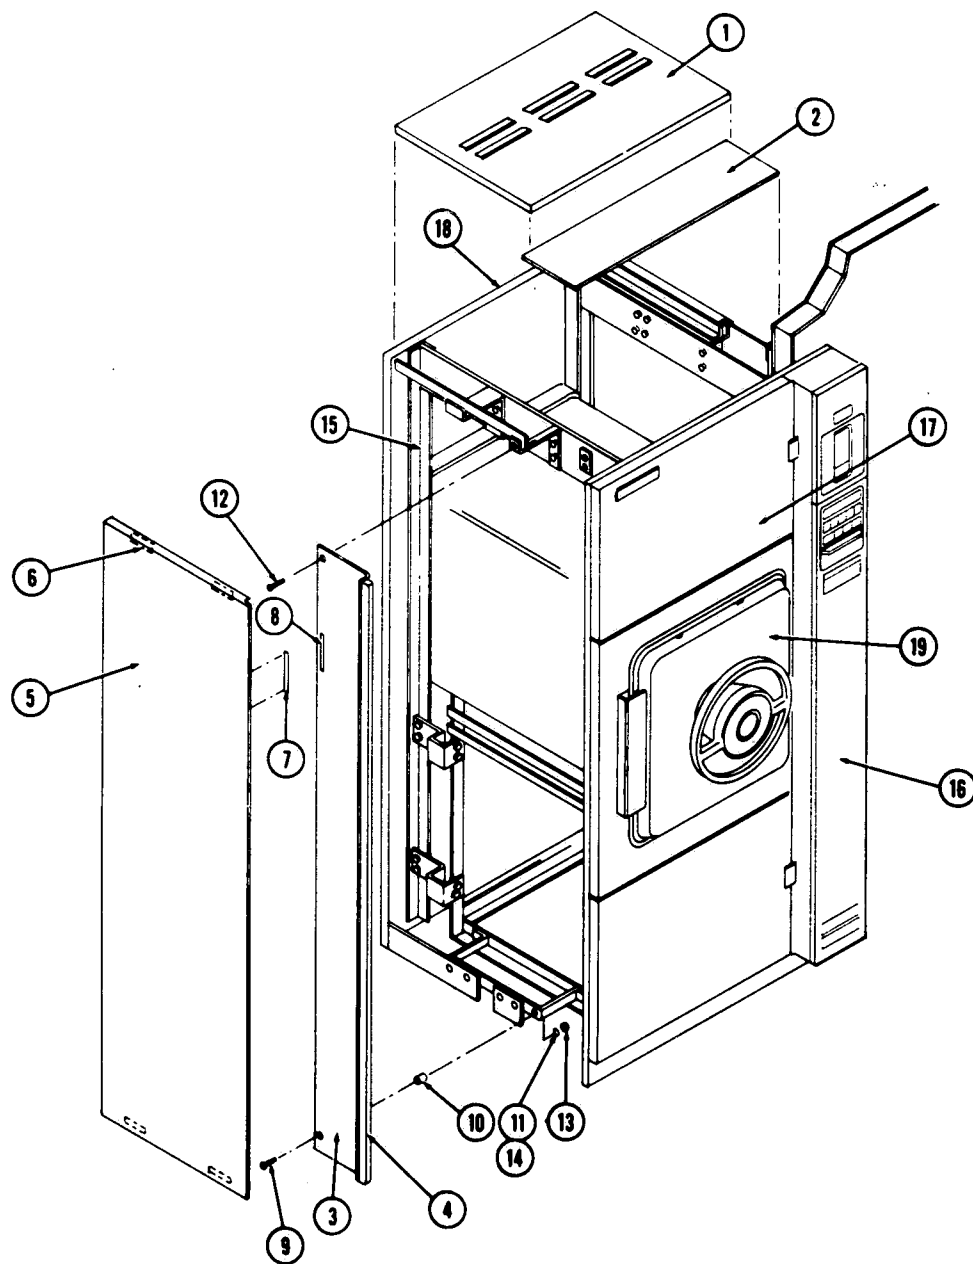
CABINET ASSEMBLY: Double Door, Recessed (Part 1 of 2)
